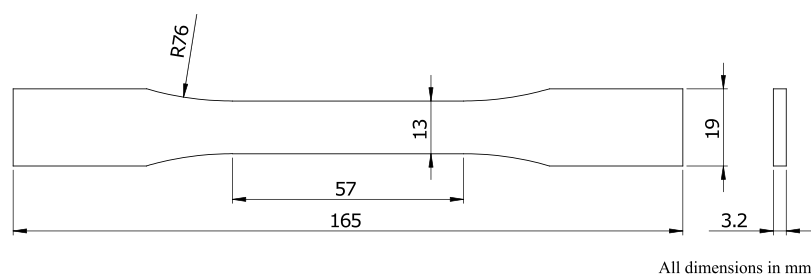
Dimensions of a type I tensile test specimen according to ASTM D638.
